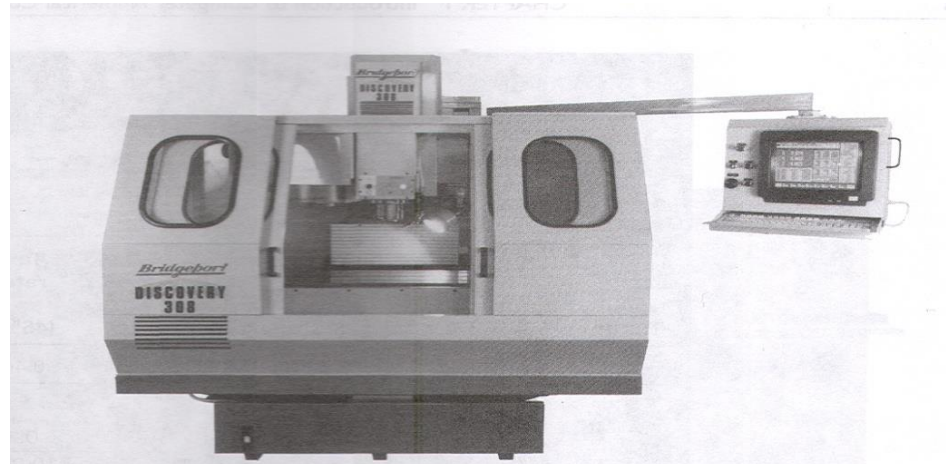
A vertical spindle machining center. (Photo courtesy of Bridgeport Machines, Inc.)
